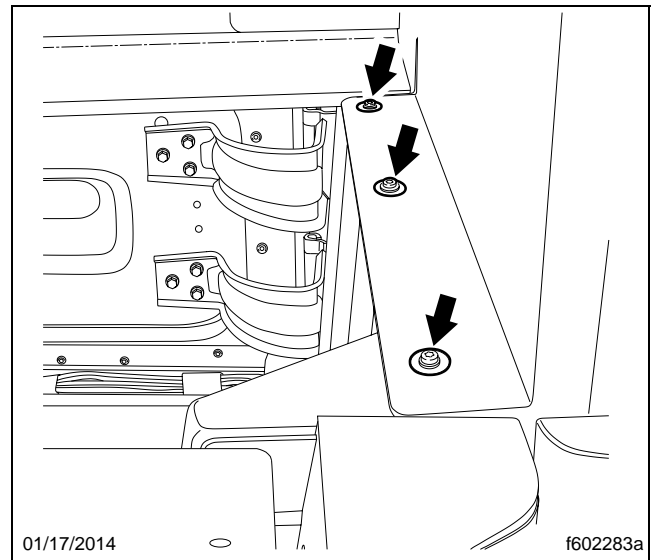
, Cabinet-to-Auxiliary HVAC Housing Fasteners, Aft Side
